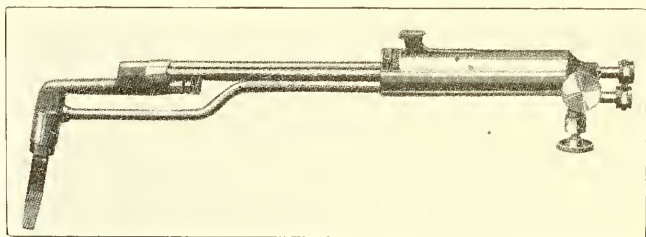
The Oxweld Cutting Torch with a Rivet-Head Cutting-Nozzle.
